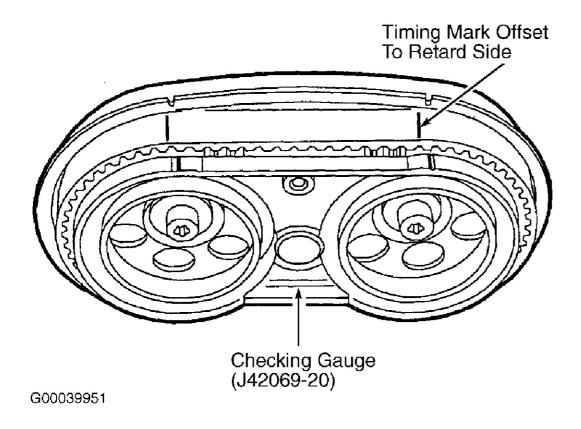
Installing Checking Gauge On Camshaft Sprockets Courtesy of GENERAL MOTORS CORP.
